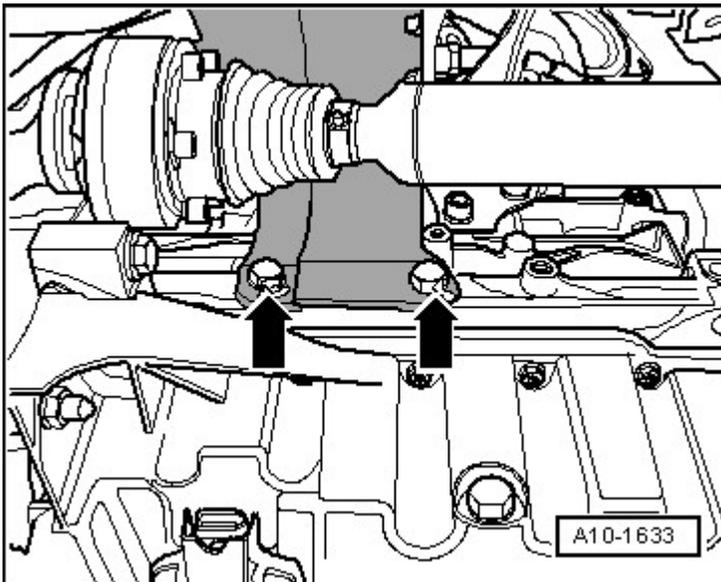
Identifying Protective Cap For Drive Axle On Engine
